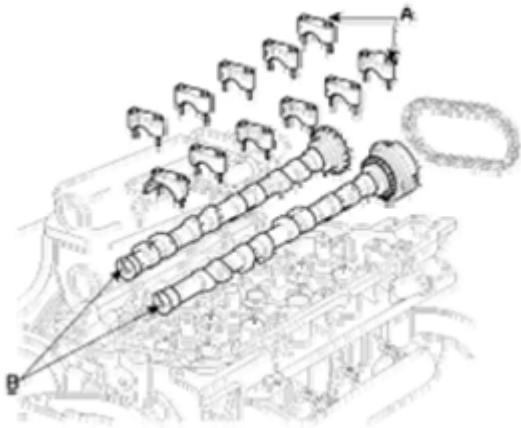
Identifying Camshafts & Camshaft Bearing Caps
